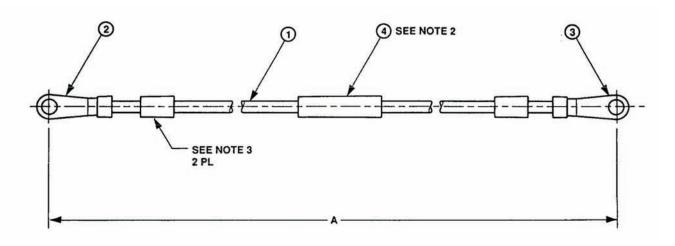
B. Wiring Harness, W10 (B & C Models, AN/MJQ-48/48A) (Sheet 1 of 2).
